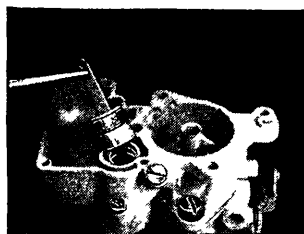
Install pump spring and pump plunger and rod. If leather is not in good condition, replace entire assembly
